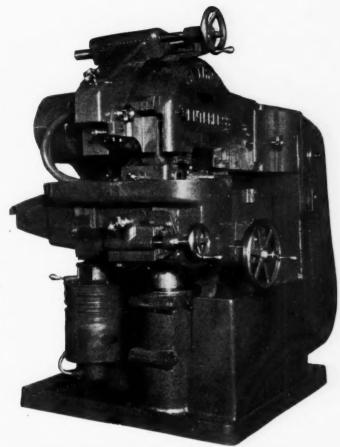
Detroit centerless grinder, in which the grinding wheel is located above the regulating wheel
